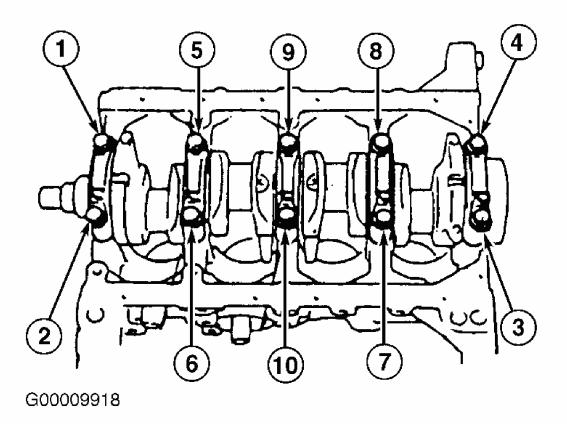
Main Bearing Cap Bolt Removal Sequence Courtesy of MAZDA MOTOR CORP.
